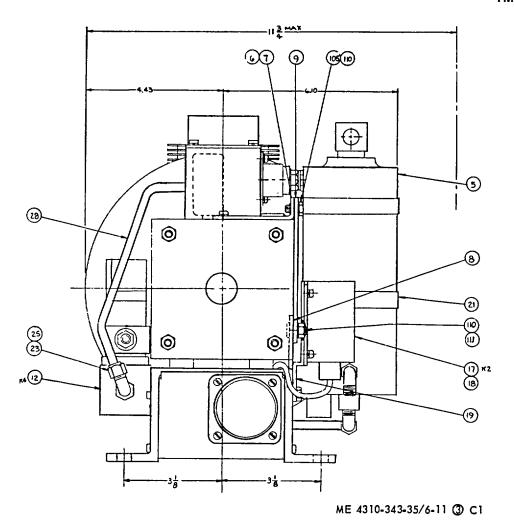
Motor-compressor assembly, Bogue Electric model 6703) (sheet 3 of 5)
